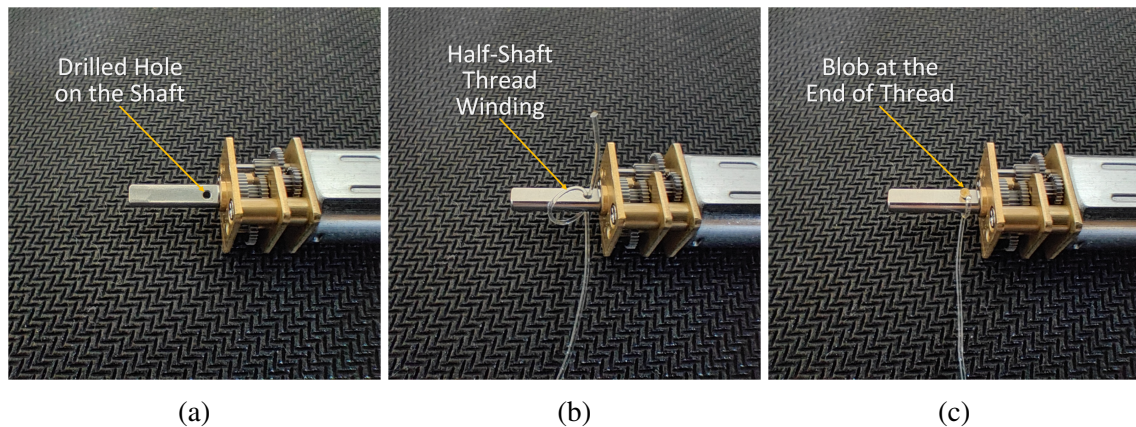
The fixation process of active threads to the output shaft of the motors. (a) The output shaft is drilled with a hole. (b) The thread is wound on the half of the shaft by one turn. (c) The end of the blob is heated to form a small blob.
